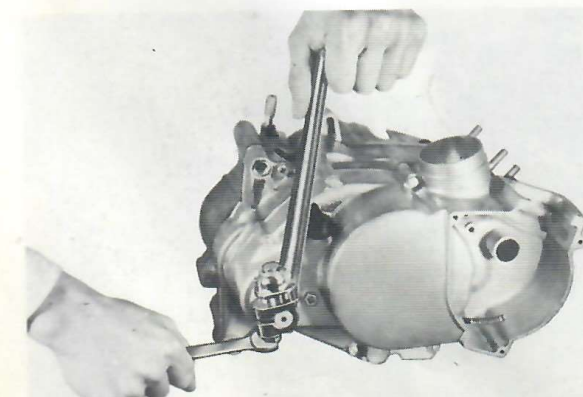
Loosening kick starter lever fitting bolt and removing kick starter lever
